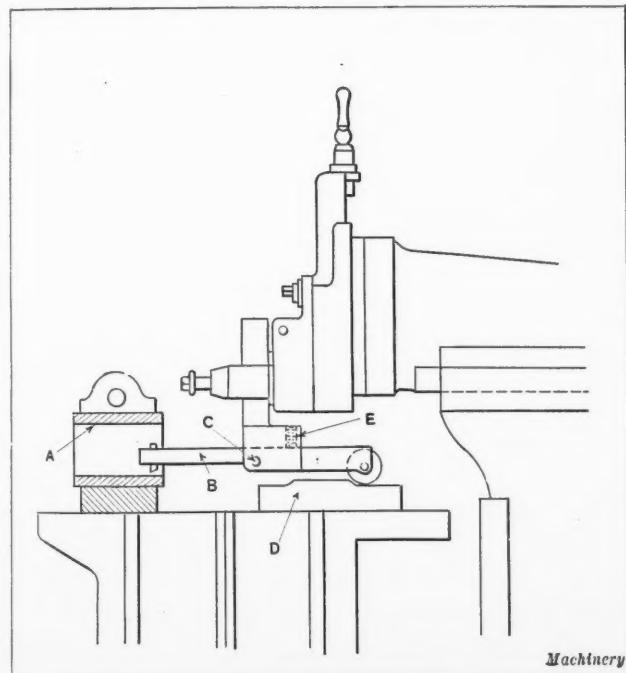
Tool Equipment for shaping Oil-grooves in Bushings
